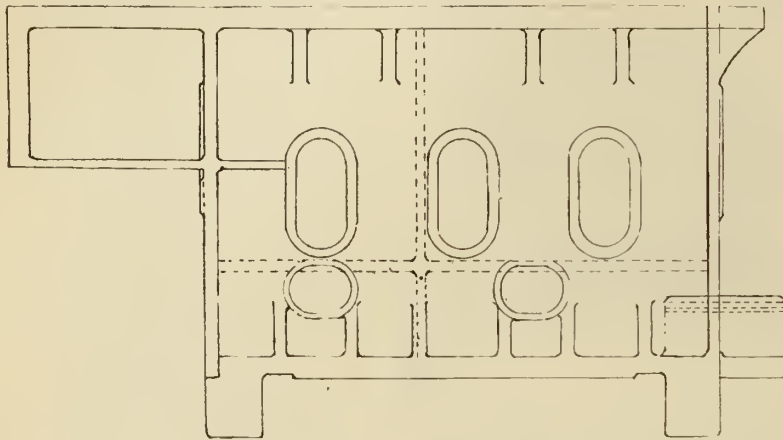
SHOWING LINE SKETCH OF MARINE ENGINE THRUST BEARING BLOCK.
